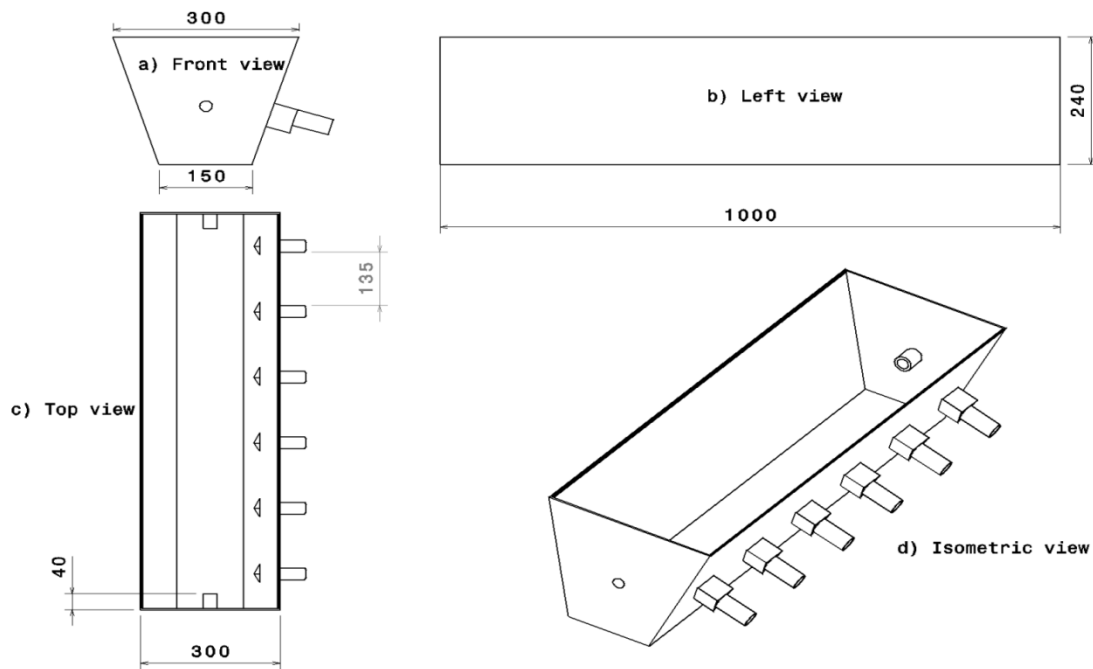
Seed hopper drawing (all dimensions are in millimeter)
